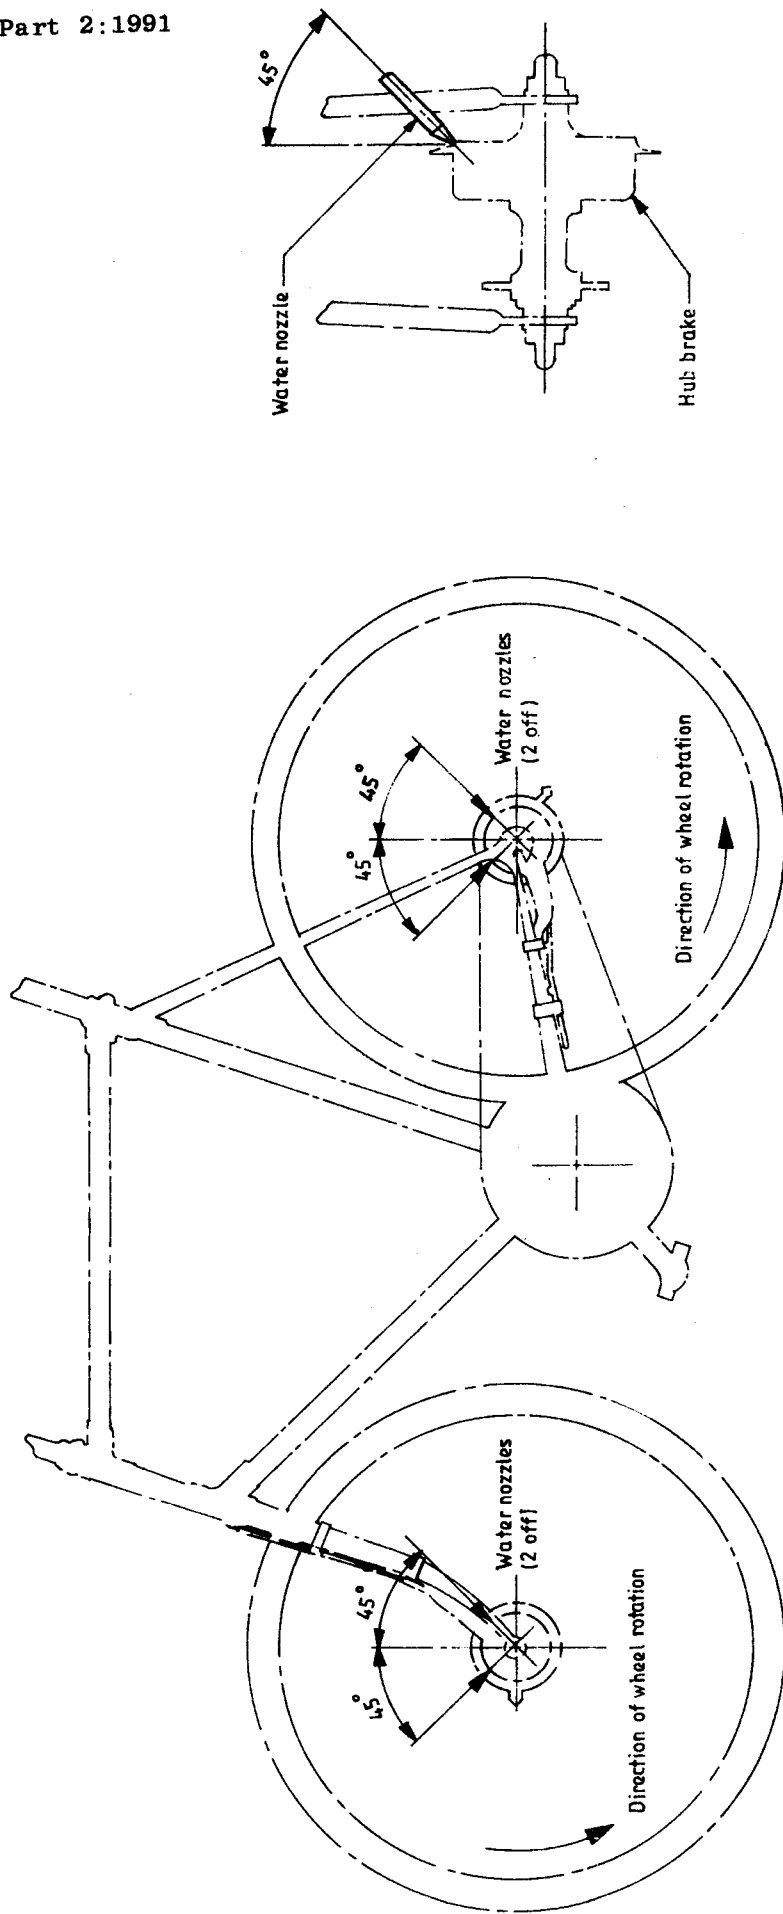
Water nozzles for internal expanding brake (front and rear)
